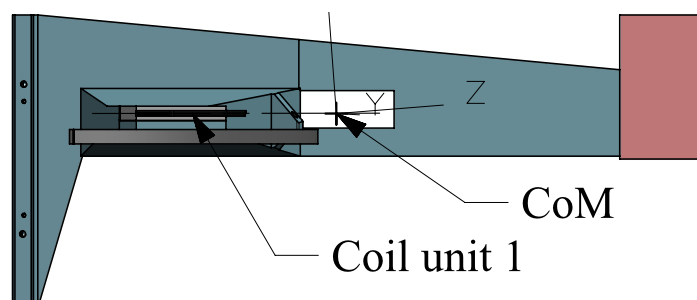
Arm 2 assembly: alignment coil unit with CoM
